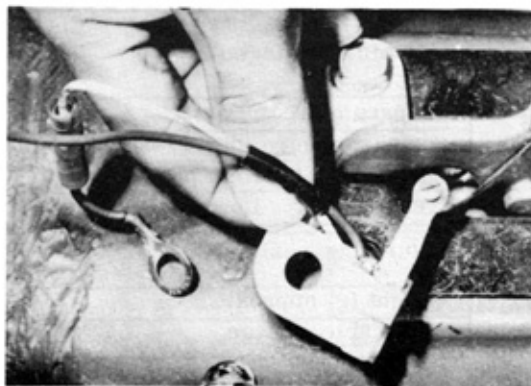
Parking Brake Lamp Switch Removal B 2385
